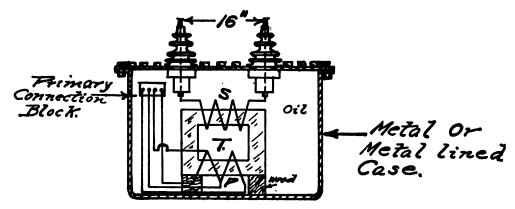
AN APPROVED METHOD OF MOUNTING THE TRANSFORMER IN A SUITABLE CONTAINER WHEN FINISHED
